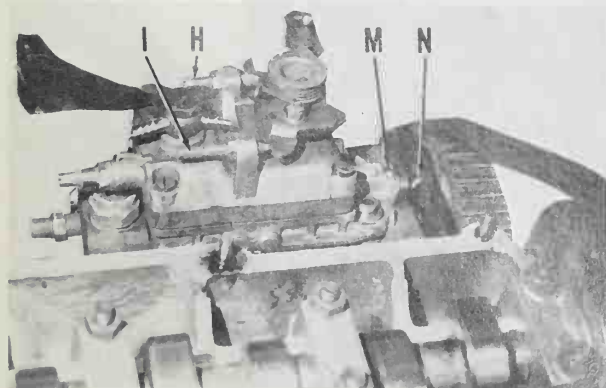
View of fuel injection pump showing location of idle (I) and high (H) speed adjusting screws. Note location of injection pump timing mark (M) and timing notch (N) on mounting plate.
